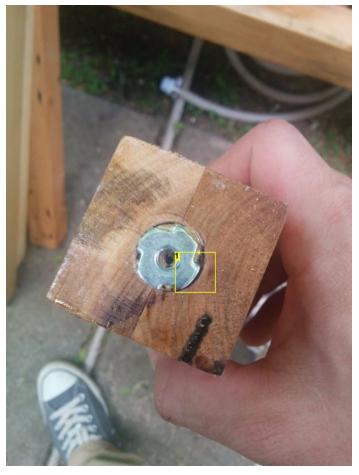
Hammering in the T-nut. Eventually I switched to a more robust epoxy (JB Weld) that holds the T-nut better.
